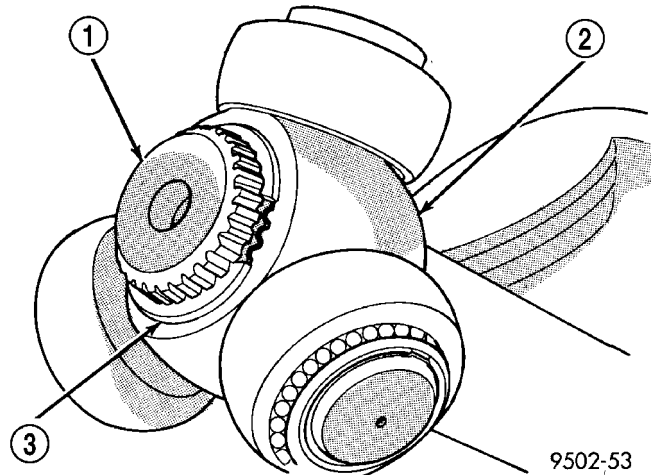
Spider Assembly Retaining Snap Ring Installed
